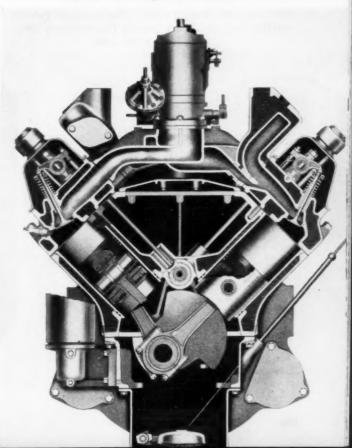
Cutaway view shows engine with cast en bloc cylinders
